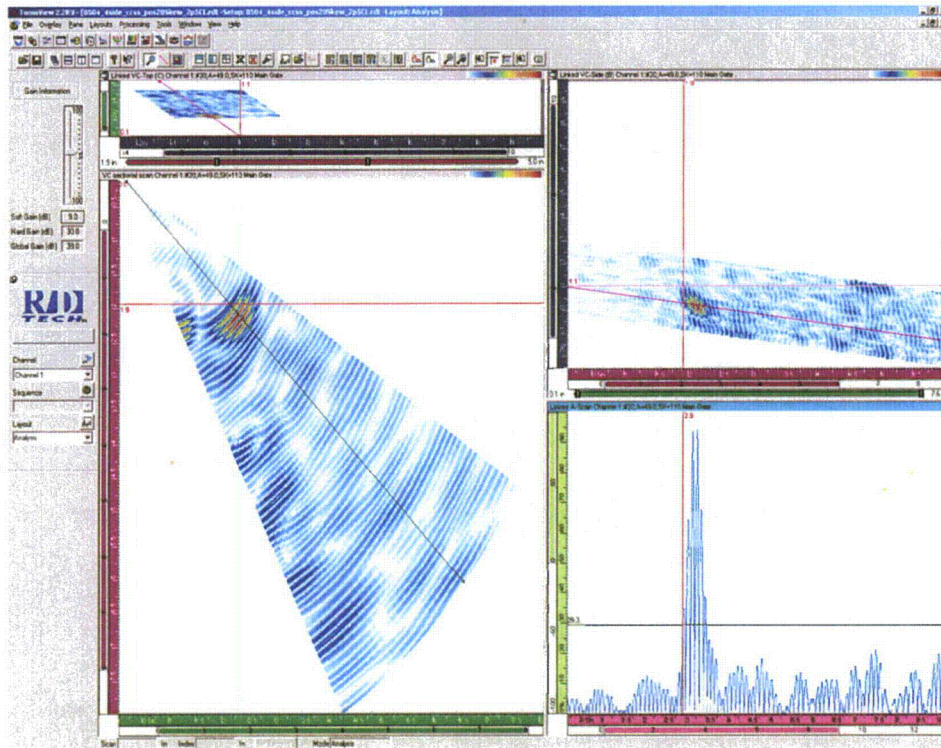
B504 as Inspected from the Equiaxed Side of the Weld, Showing a Yes Detected
